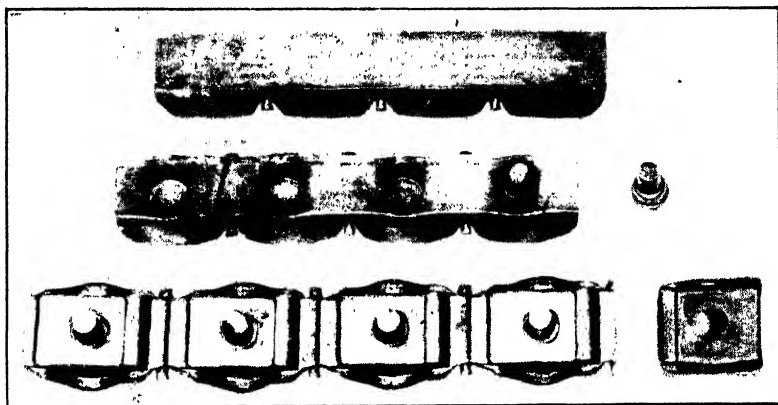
A series of cold-forging operations to produce a copper contact point.
